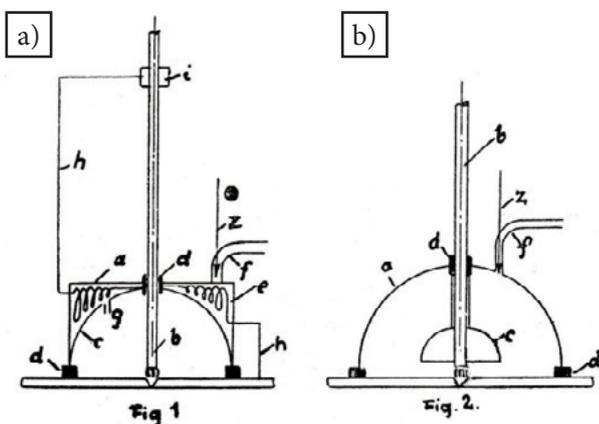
Schematic diagram of a machine for steam-shielded welding with the heater generating steam (a) and without the heater (b) [41]
